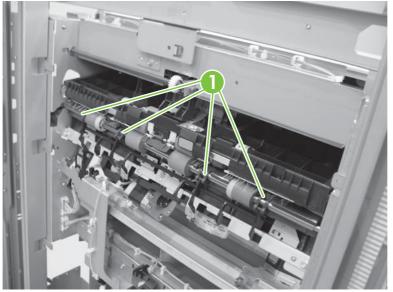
Remove the operation-tray assembly (1 of 6)
